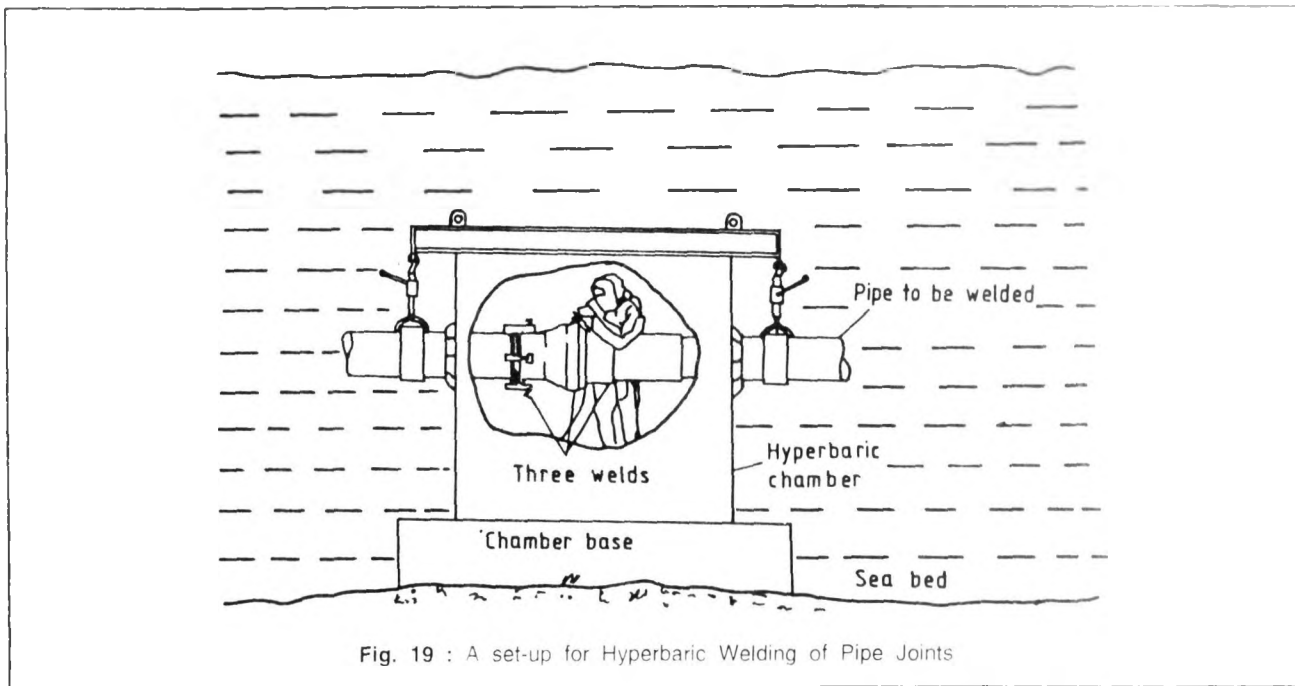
A set-up for Hyperbaric Welding of Pipe Joints
